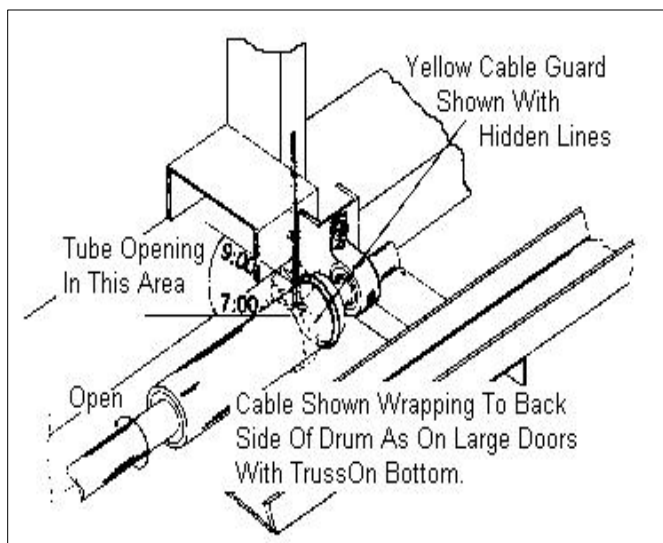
Adjusting drive shaft for proper stopping position—large doors
